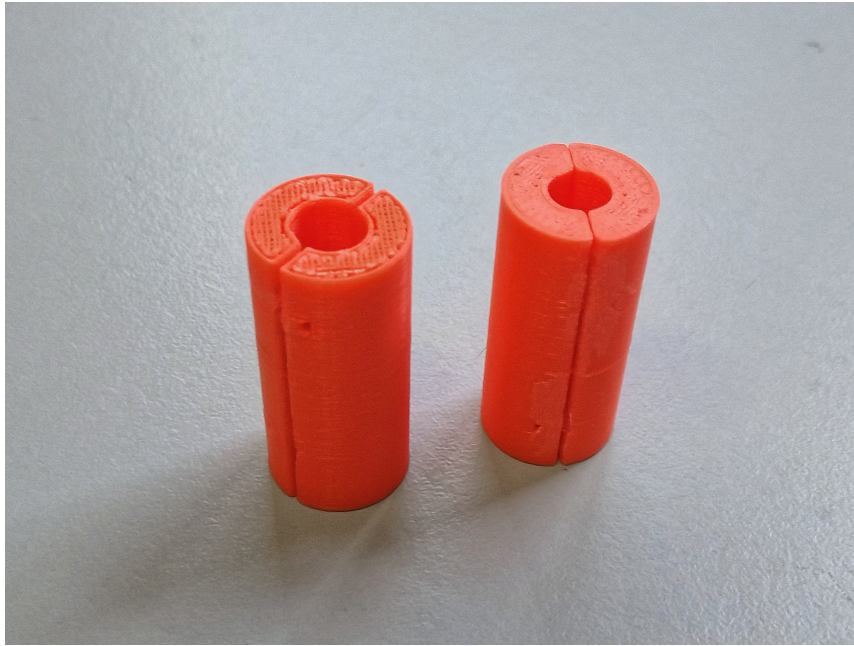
Photograph of the 3D printed connector interfaces.
